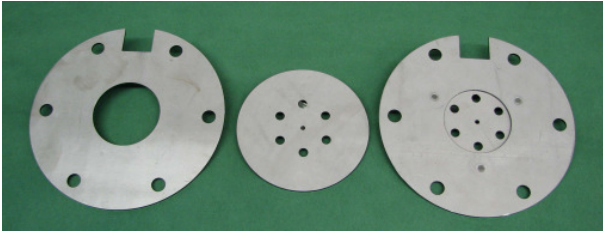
Torsion Specimen: inner disk and outer ring (left and mid-side), 3-point-torsion specimen joined with self piercing solid-rivets (right side)
